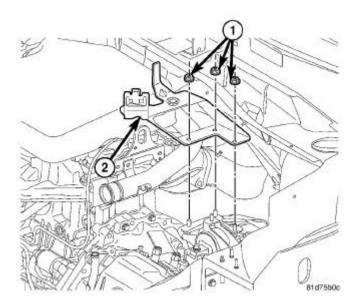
Coolant Bottle Bracket Courtesy of CHRYSLER LLC
